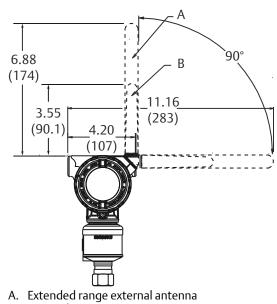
Transmitter with In-line Sensor Module (Front View)
